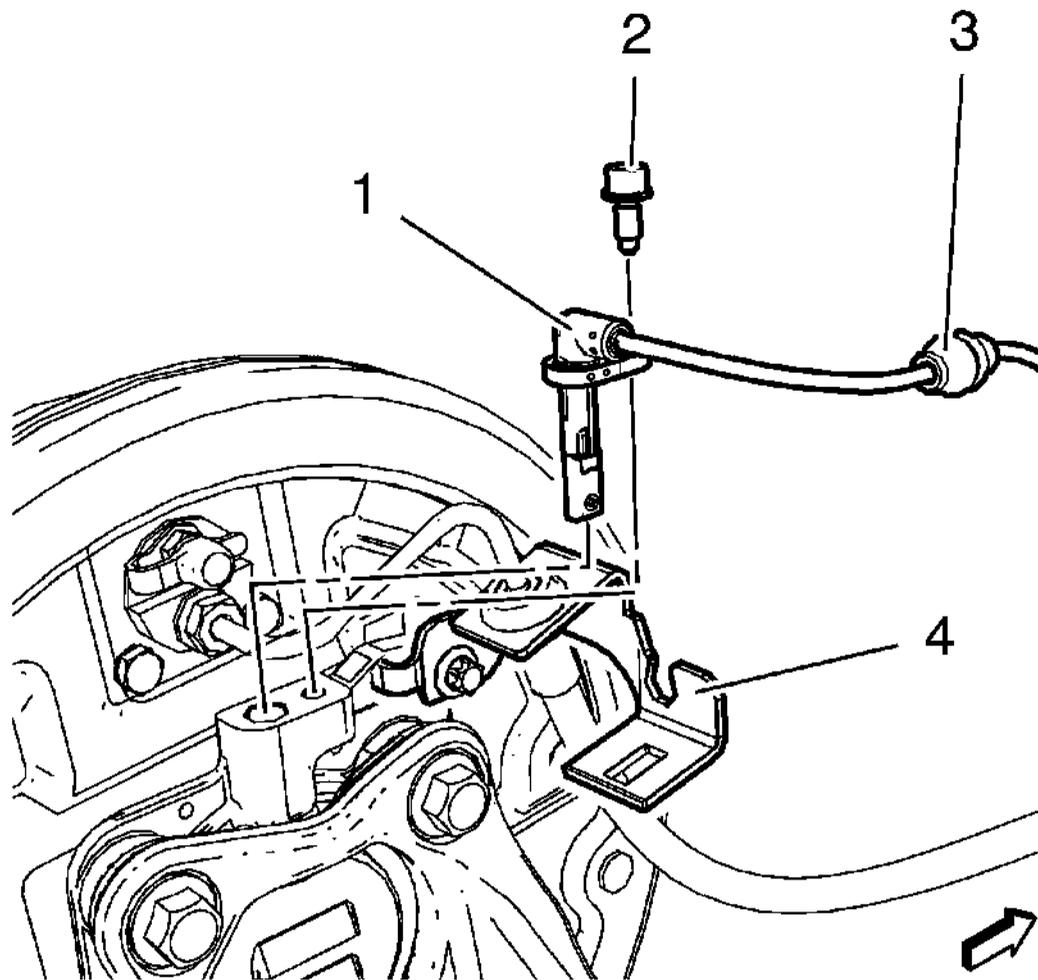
Wheel Speed Sensor And Wheel Speed Sensor Screw
